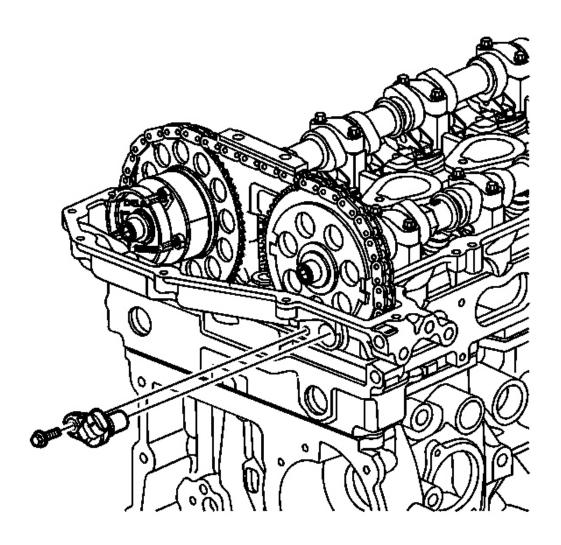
View Of Intake Camshaft Sensor Courtesy of GENERAL MOTORS CORP.
